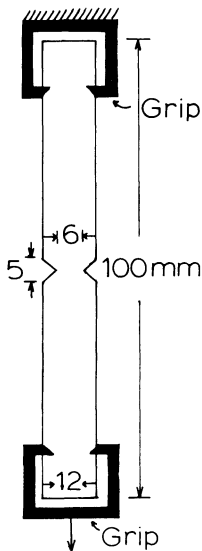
Shape and dimensions (mm) of the specimens, way to stress.
